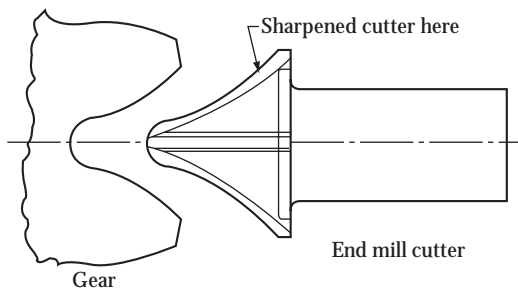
Coarse-pitch spur or helical gears can be cut on a hobbing machine with an end-mill type of cutter.
